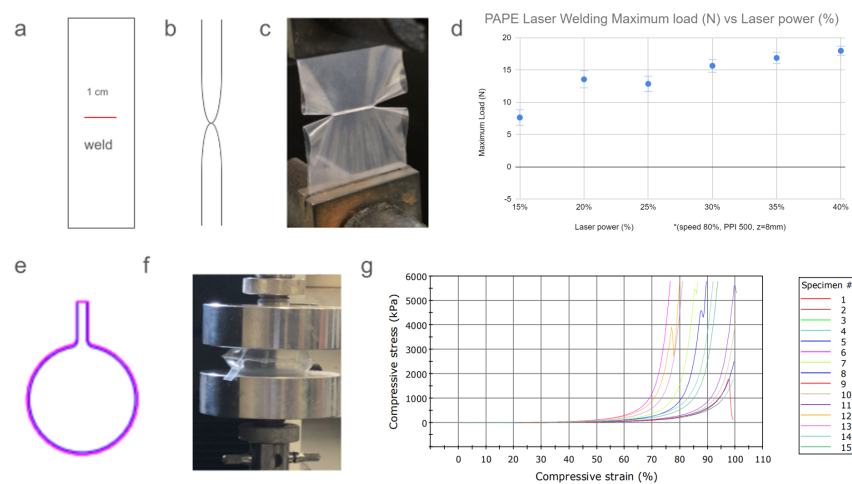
Calibration test for laser welding of PAPE bilayer using an Instron testing machine. (a) Design for a 1 cm weld. (b) Side view illustration of the 1 cm weld as it is tested in the Instron testing machine. (c) Image of the 1 cm weld as it is stretched until failure by the Instron testing machine. (d) A chart describing the maximum load at failure. (e) Design for an airbag. (f) The airbag is tested for maximum load by the Instron testing machine. (g) Strain vs stress on different airbags with the same design each color represents one experiment on one airbag.
